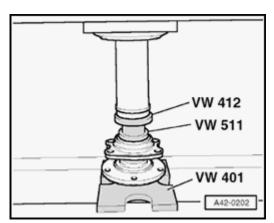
Pressing Wheel Hub Into 82 mm Diameter Wheel Bearing Courtesy of VOLKSWAGEN UNITED STATES, INC.
